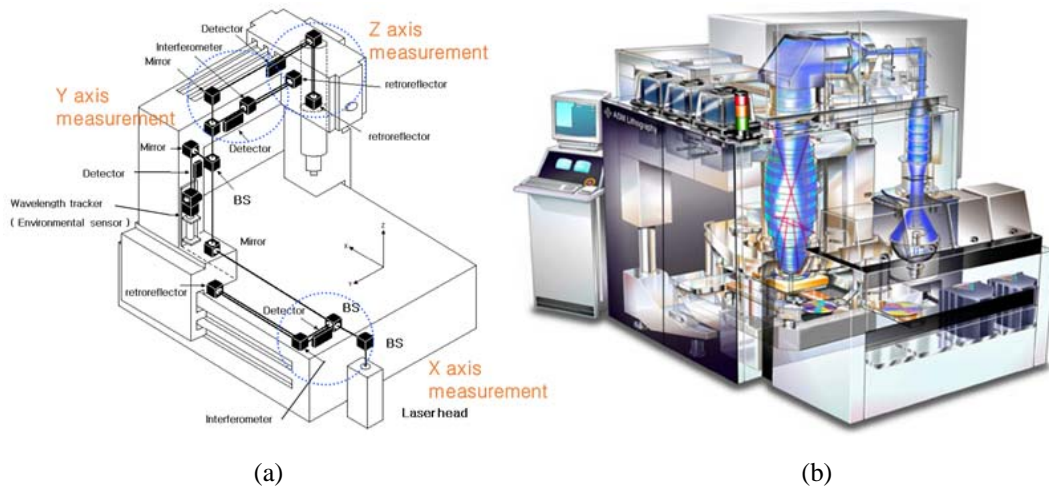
Laser interferometers adopted in (a) coordinate measuring machine (CMM) and (b) lithography machine
